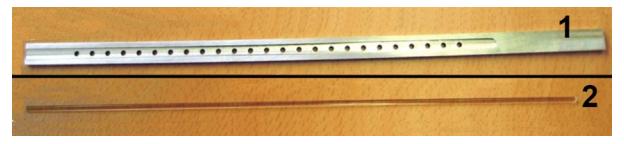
Reference tools, 1 (metal) & 2 (glass).
